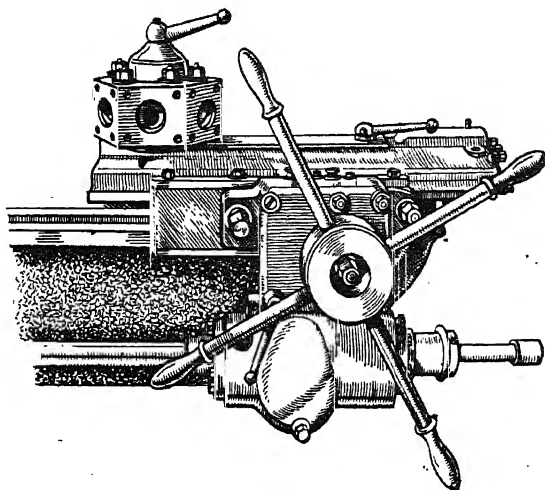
The turret head of a capstan lathe is carried on a separate slide.
